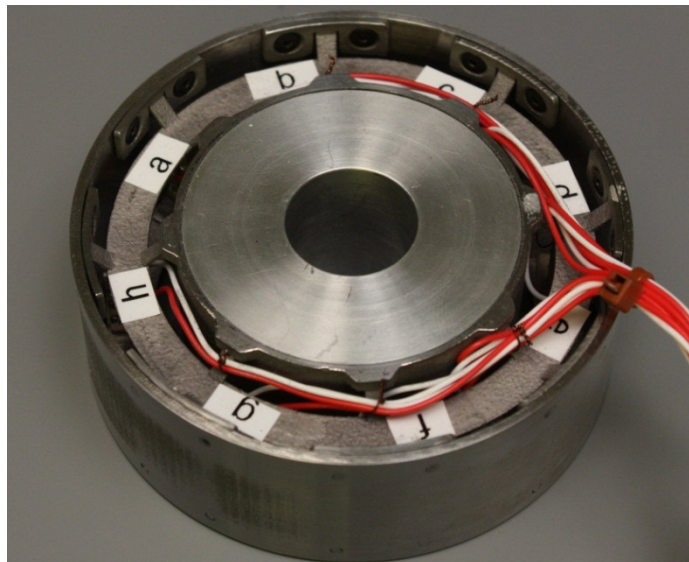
Con10b prototype created by DMLS. Shown with an aluminum mounting fixture inside.
